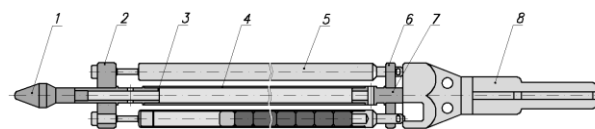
Design of TVS-XD1 [1]: 1 – head; 2 – upper grid; 3 – connector adapter; 4 – central tube; 5 – dispersion nuclear fuel element; 6 – lower grid; 7 – muft; 8 – bottom nozzle
